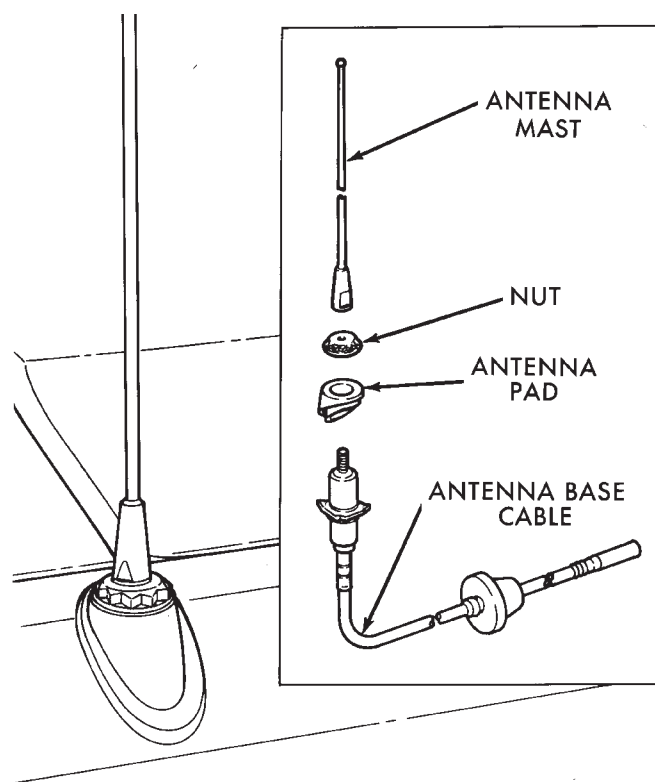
Nut and Antenna Pad Remove/Install - XJ
